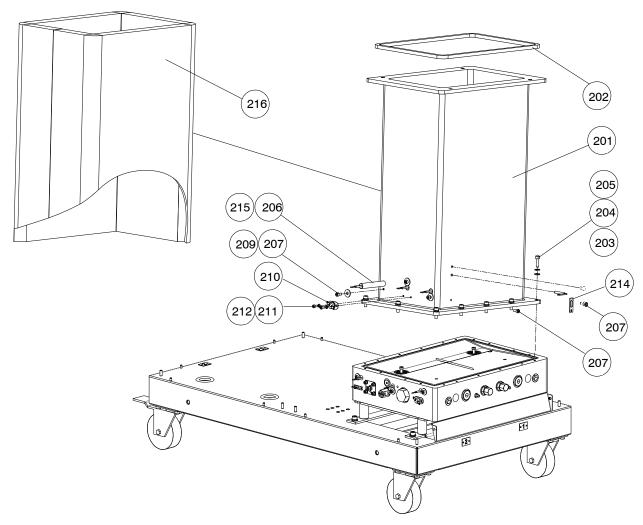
Melter hopper assembly parts (20L hopper shown)
